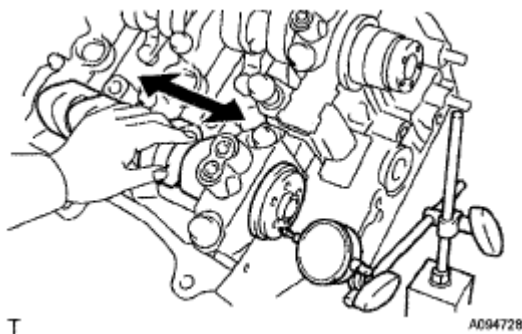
Measuring Thrust Clearance While Moving Camshaft Back And Forth
